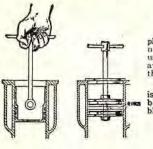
Rings may be placed in an old piston. A new piston should not be used because it will wear away to some extent, and this is objectionable.
